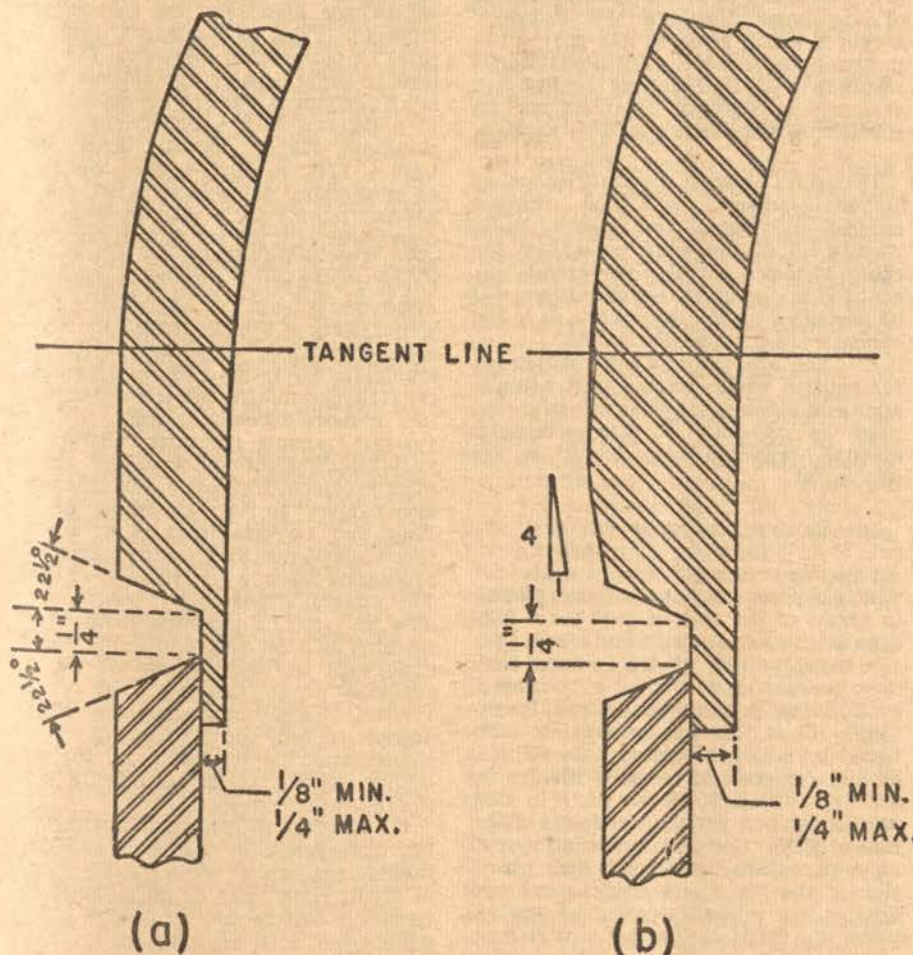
Optional welding for head-shell joints (when inside diameter is not over 36 inches).
